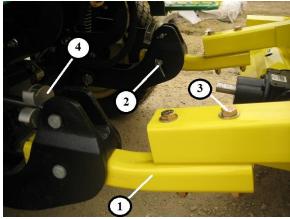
Attaching the Harvesting Unit (PTO removed for clarity)
